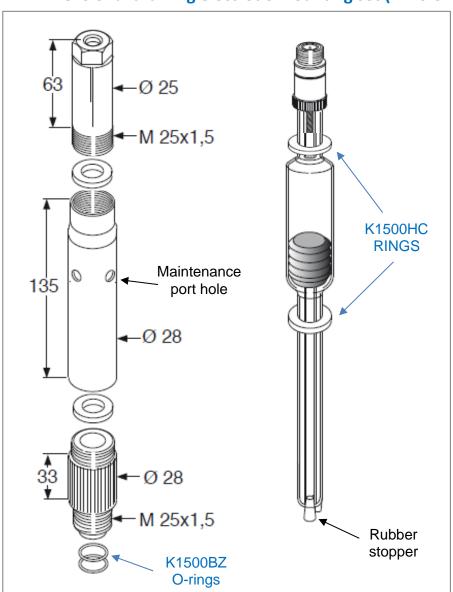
Mounting kit FP20-S13 for Bellomatic in subassembly (FS20), flow- or immersion fitting (FS20 or FD20)
